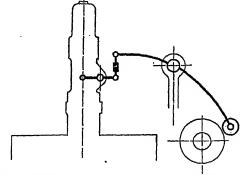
Diagram of Tosi Fuel Injection Valve Actuating Gear.
